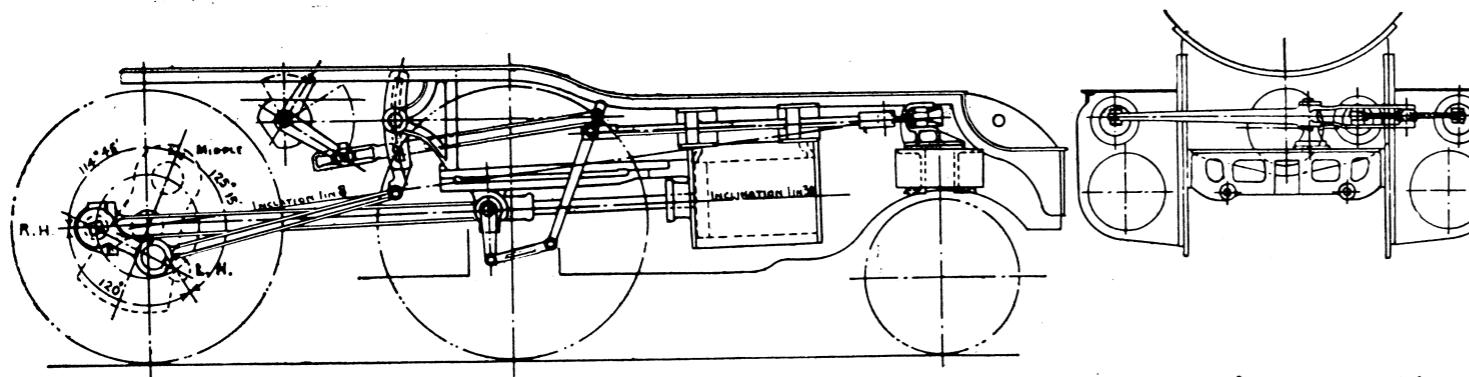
Arrangement of Valve Gear, G.N.R.
